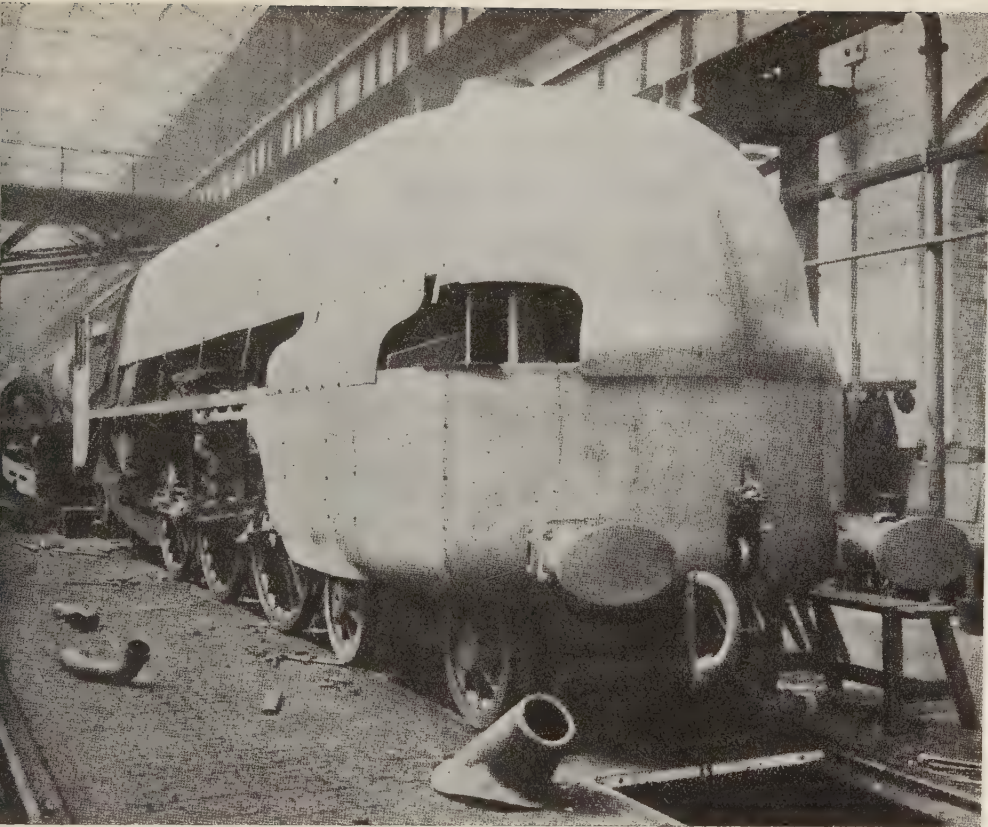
Engine partly completed in Crewe works. Streamlining casings in course of erection.
